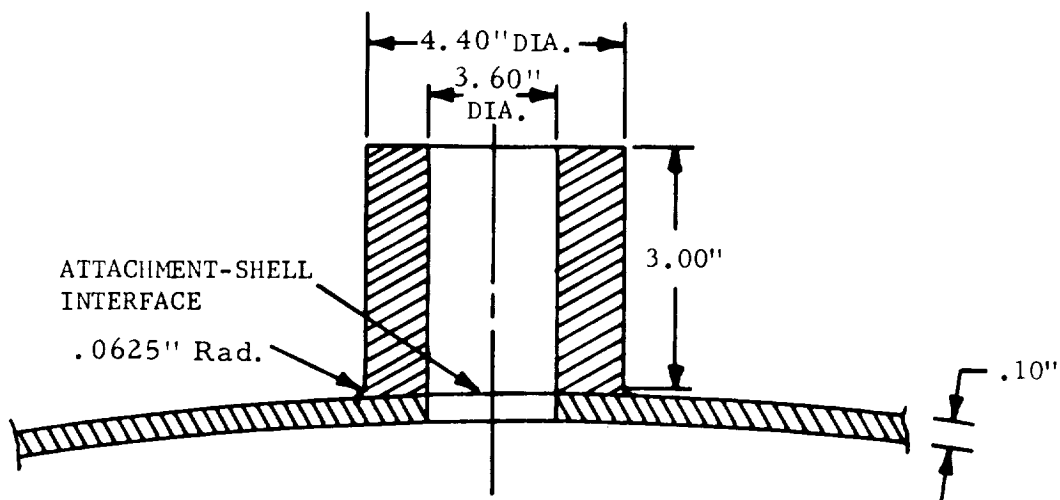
Welded Hollow Attachment (Detail A)
